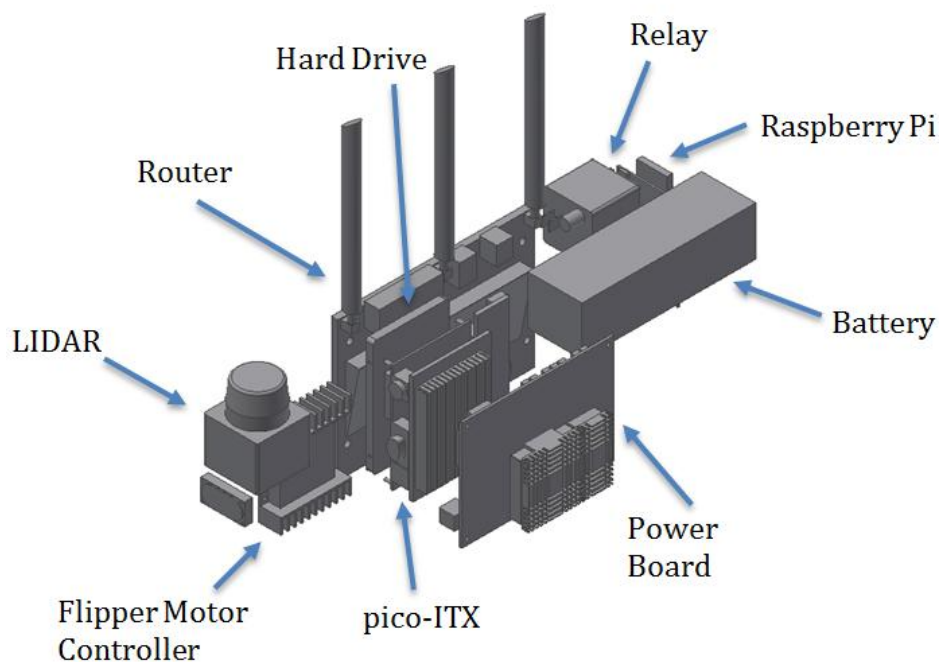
Detailed CAD Models of Electronic Components within Chassis
